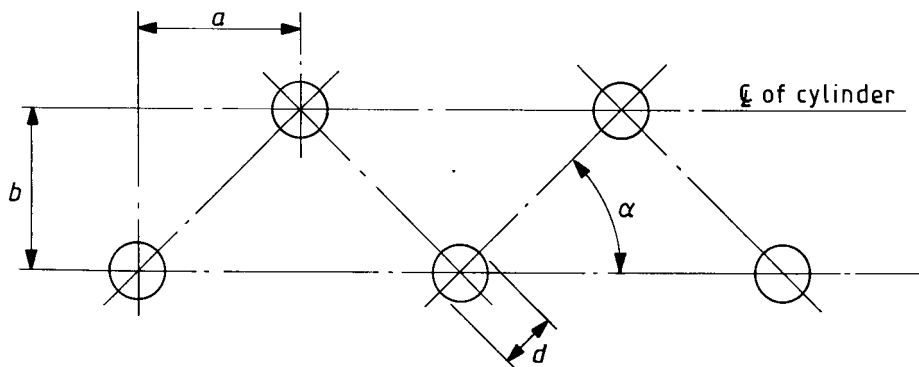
Regular saw-tooth pattern of holes
